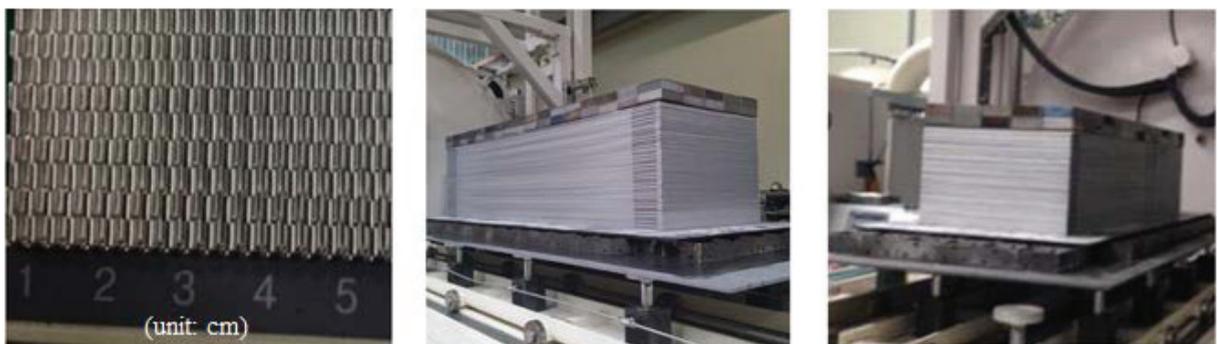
Photographs of serrated fins and stacked plate-fins for brazing.
